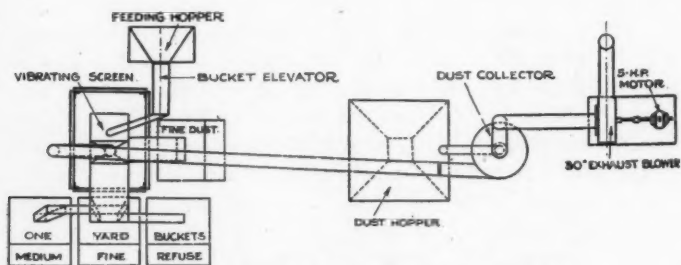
PLAN VIEW SAND RECLAIMING SYSTEM
